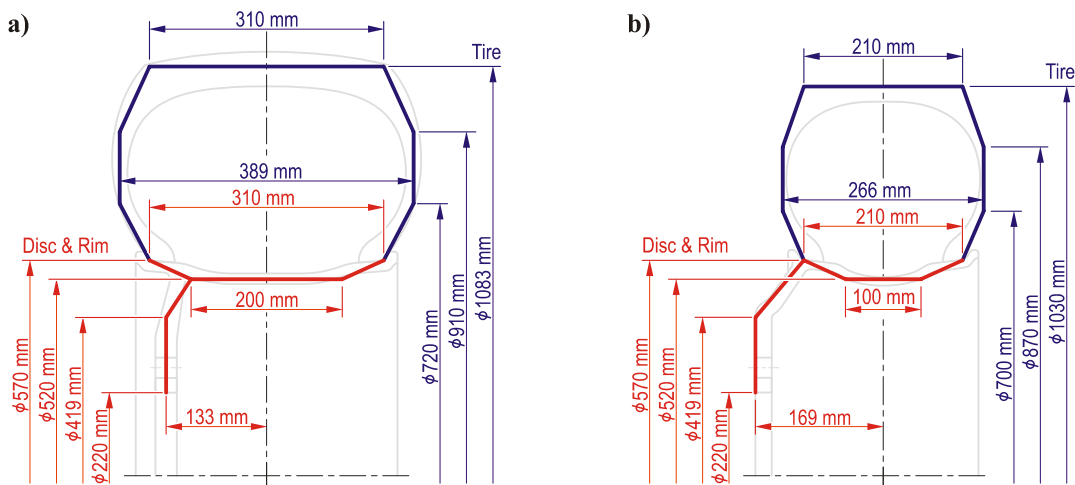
Dimensions of the cross-section of the crane wheel FE model: a) front wheel, b) rear wheel
